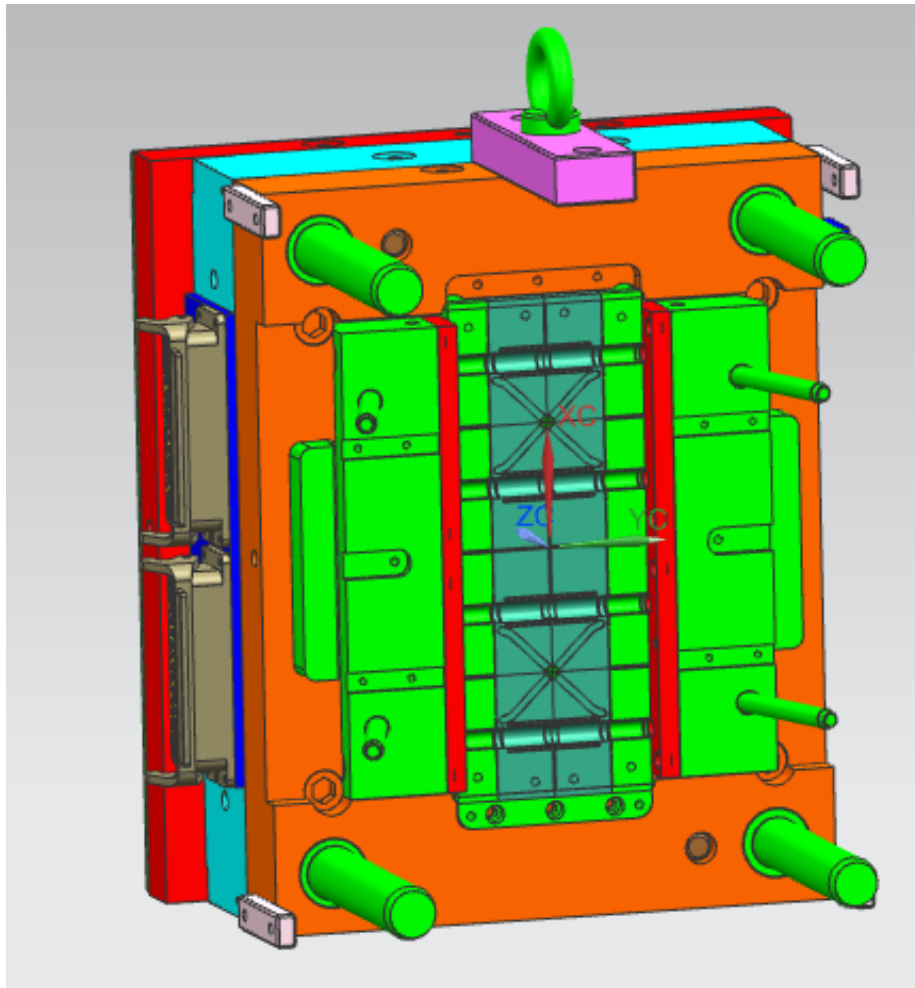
This is a CAD drawing of the inside of the injection molding tool, showing the environment in which the gripper operates. There are two rows of four parts, eight in total to extract from the mold. (Source: Sture Sørli, Kongsberg Automotive Raufoss)
